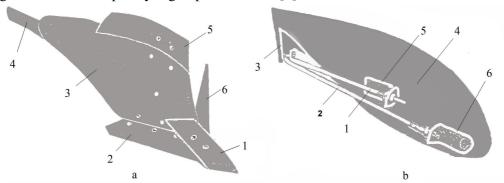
Semi-helicoidal body KAUR–40 AGS having an adjustable curvature of the mouldboard: a – frontal sight: 1 – point (chisel); 2 –share; 3 – mouldboard; 4 – mouldboard extended lamina; 5 – trash-board (skim coulter); 6 – knife; b – rear sight: 1, 2 – spreaders for support and regulation of the share mouldboard curvature; 3 – foot of body; 4 – mouldboard; 5, 6 – struts
